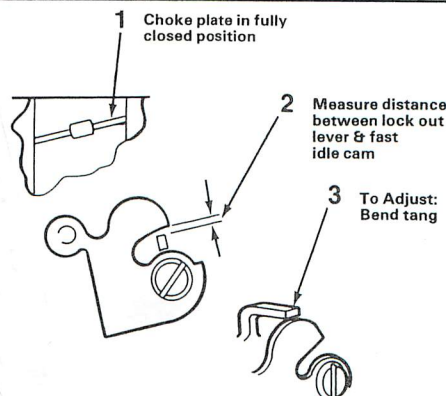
SECONDARY LOCK-OUT ADJUSTMENT
